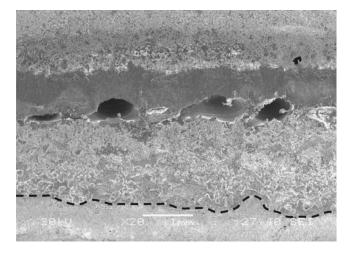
Typical interfacial shear fracture appearance of weldments similar to that shown in Fig. 5, but without addition of Al to suppress Zn vapor evolution. The outlined area beside the weld has had its galvanneal coating removed by evaporation of the Zn. Welding speed 0.7 m/min.
